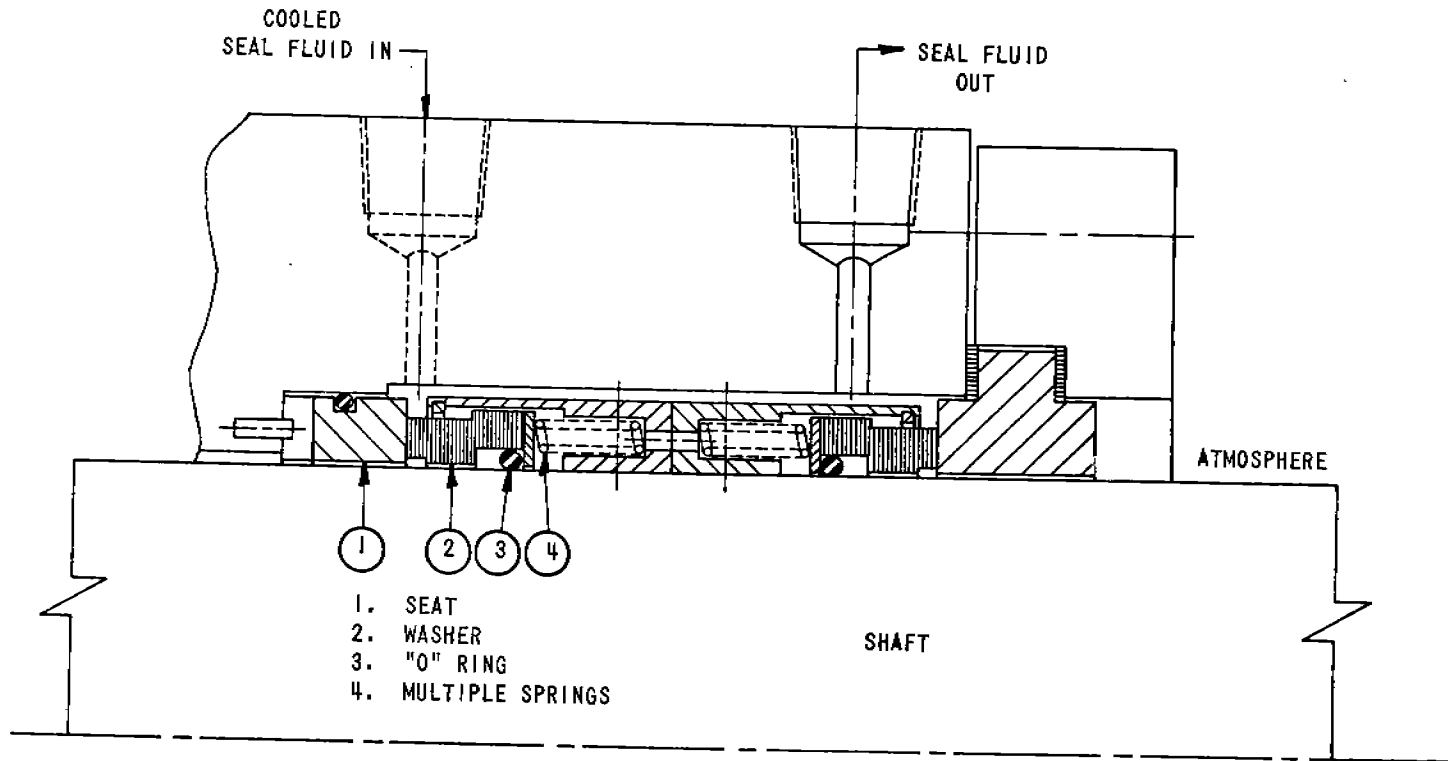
DOUBLE-PUSHER SEAL ARRANGEMENT
